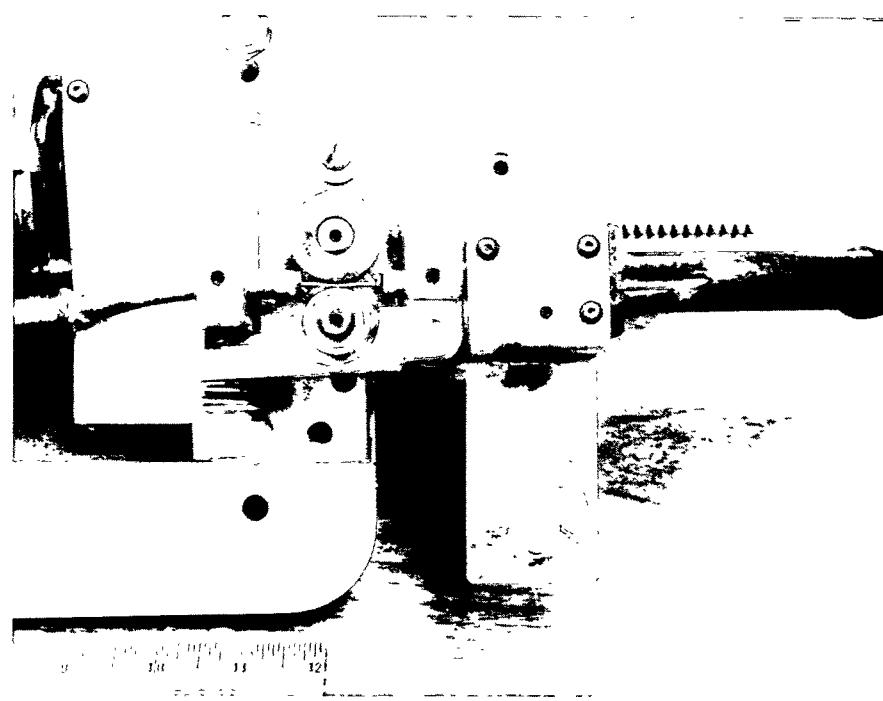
Wire Feed Mechanism and Welding Nozzle.
